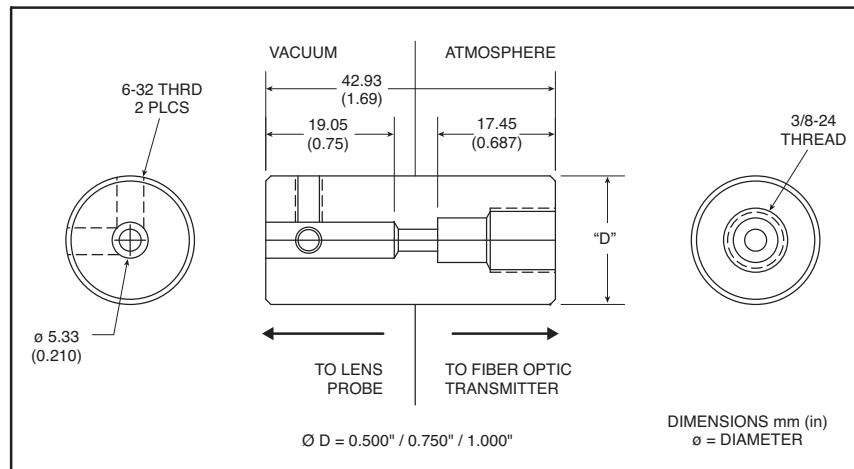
General Dimensions, Vacuum Bushing OS4000-VB
